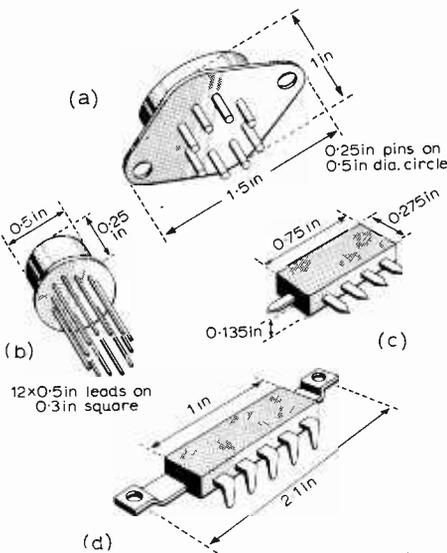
Examples of medium-power linear microcircuit packages; (a) Modified multilead TO-3 power transistor package (2-5W); (b) modified multilead TO-8 intermediate power transistor package (1-2W); (c) modified dual-in-line with integral tongued heat sink (1W); (d) modified dual-in-line with integral heat sink for bolting to chassis (3W).
